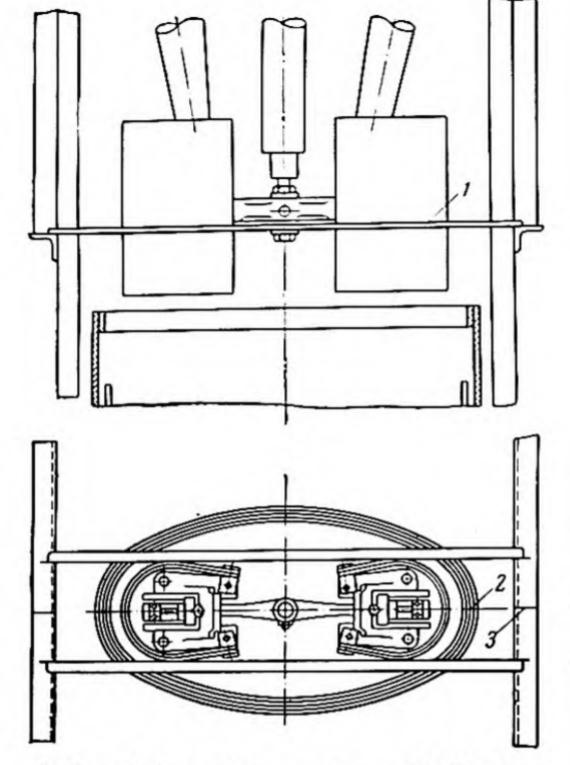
Centring checking: 1—straight edge; 2—tank weld seam; 3—midpoint mark
